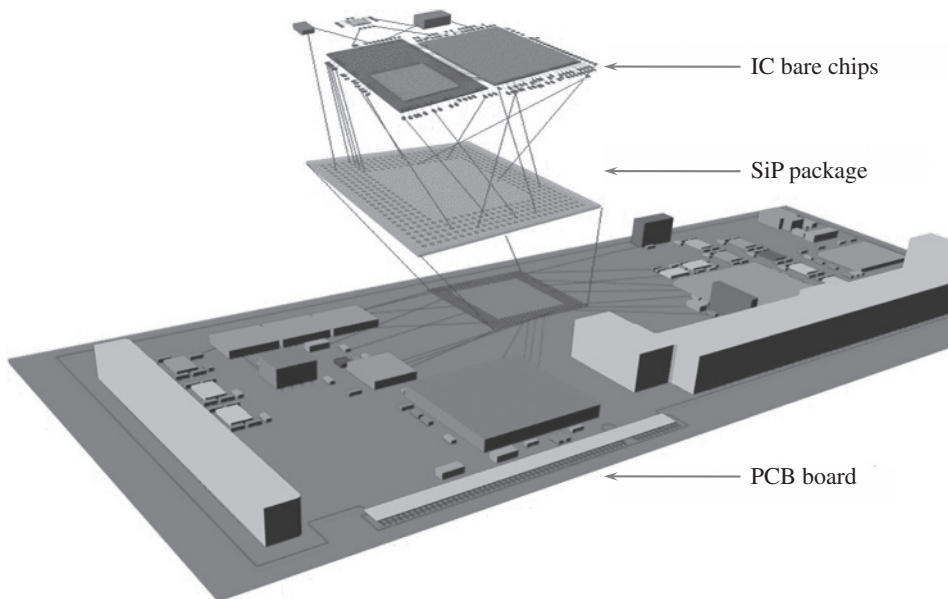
The relationship between IC bare chips, SiP package and the PCB board-level system.
